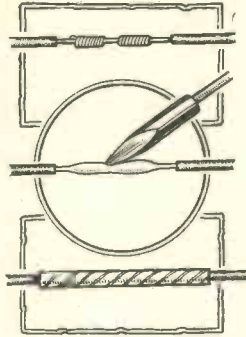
METHOD OF INSULATING JOINTS IN THE WINDING.
